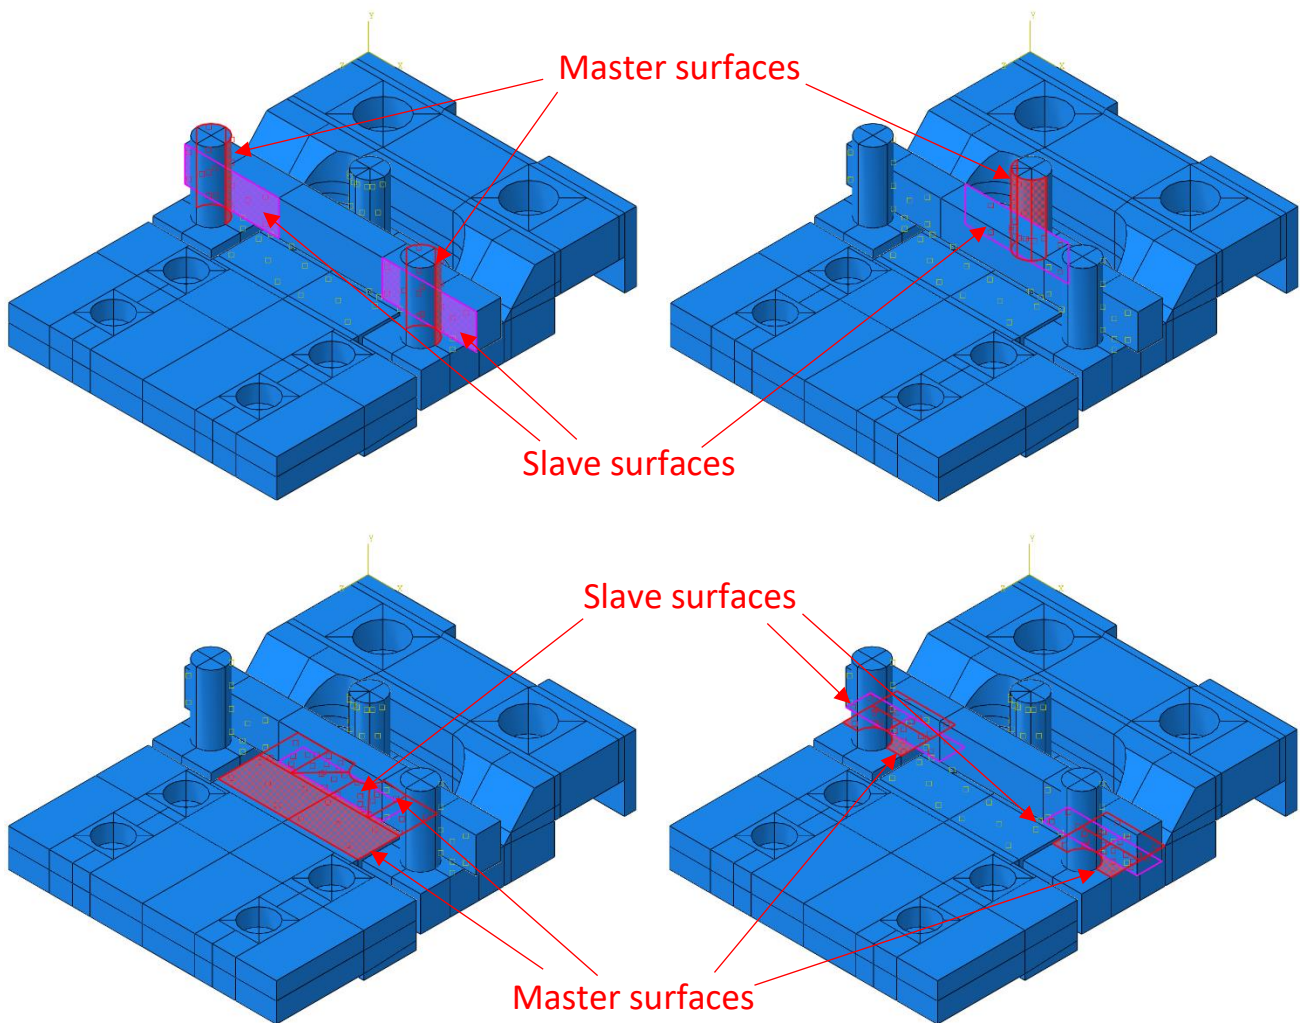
Contact surfaces with the former, support and specimen interactions selected. The master surfaces are in red, the slaves are in purple. Top left, the supports and the specimen, Top right, the former and the specimen, bottom left the former body and the bottom horizontal surface of the specimen, bottom right, the support body and the bottom horizontal face of the specimen.
